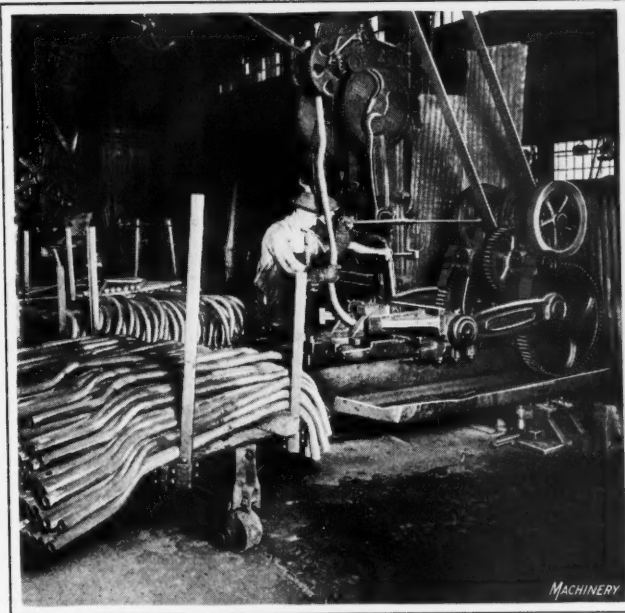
Use of a Bulldozer for bending an Automobile Exhaust Pipe
